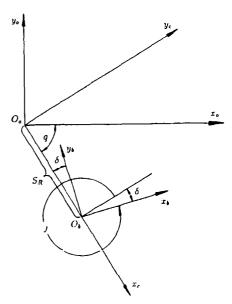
Cutting Machine and Cradle Coordinate Systems.
